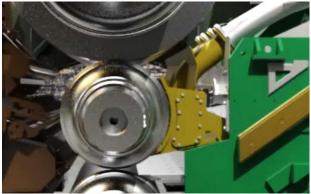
Technical drawing of the HTRC implemented in the FM2 stand exit guide of HSM2.
